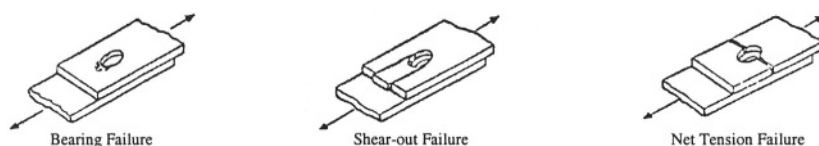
Potential Modes of Failure in Graphite/Epoxy Bolted Joint Specimen.
